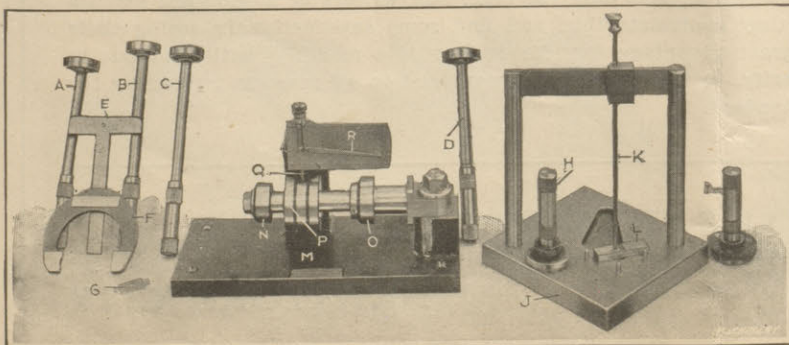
Collection of Wells Bros. Co.'s American Shrapnel Shell Gages
